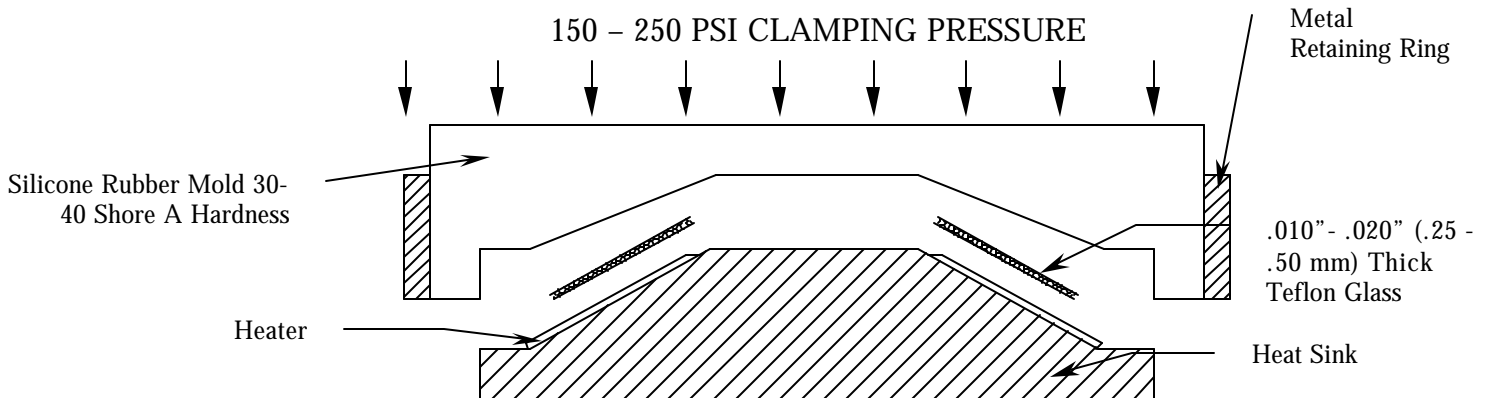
CLAMPING FOR CURVED HEAT SINK
